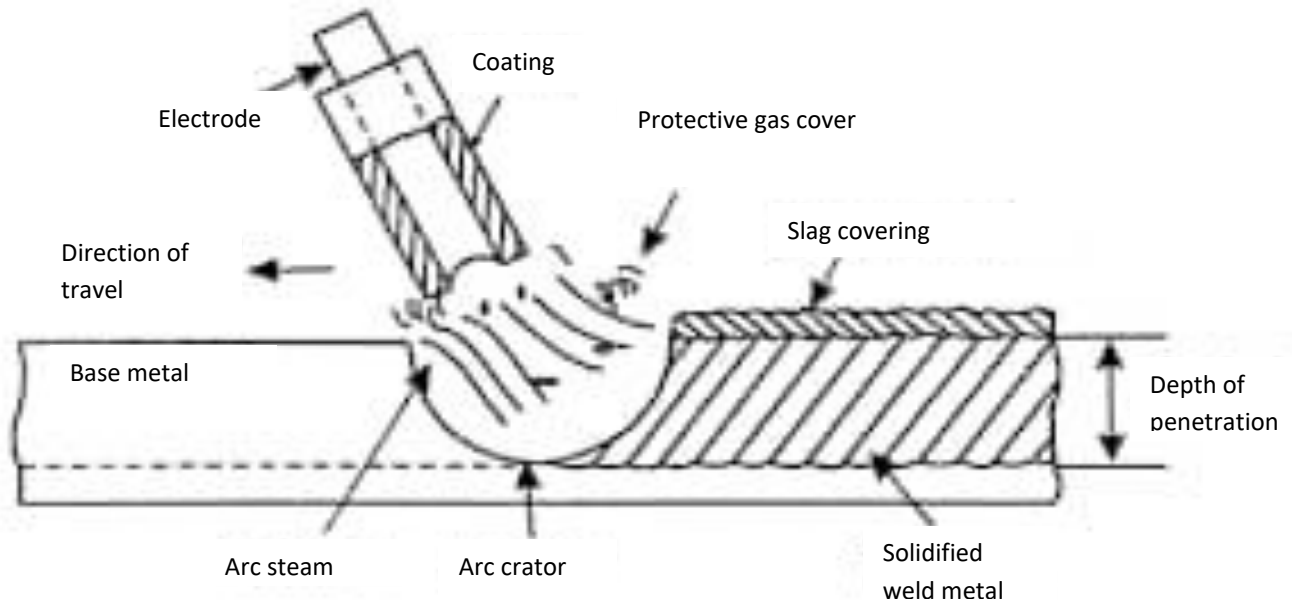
Cut away view of the arc welding with a coated electrode
